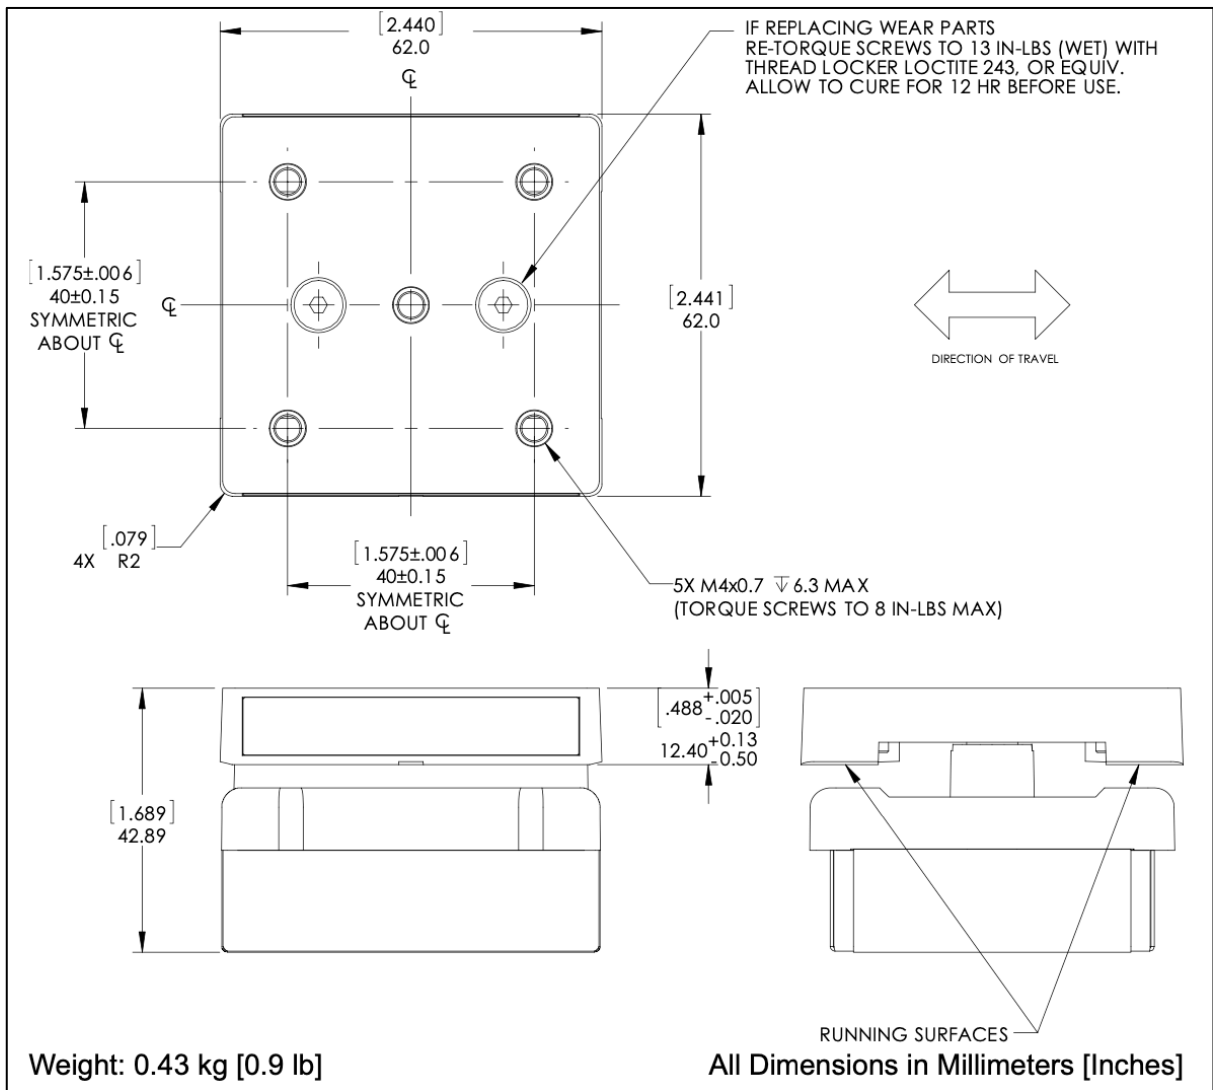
Puck Drawing (Moving Magnetic Part)
